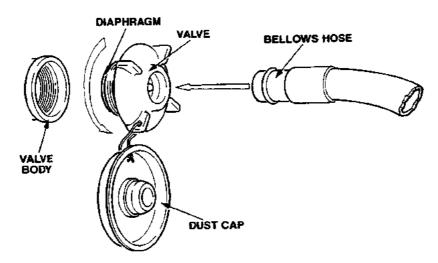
5.4m RIB - Buoyancy Tube Valve Assembly
